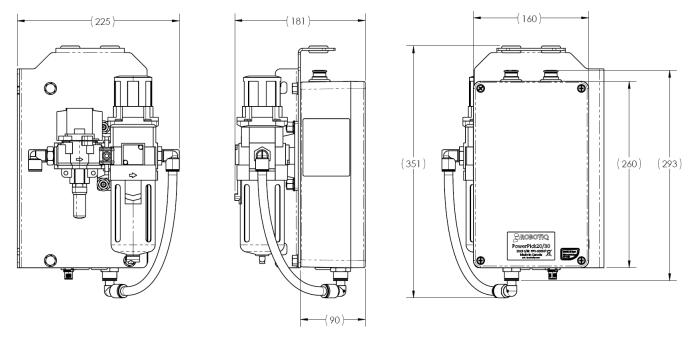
Technical Dimensions of PowerPick20/30 Vacuum Generation Unit
